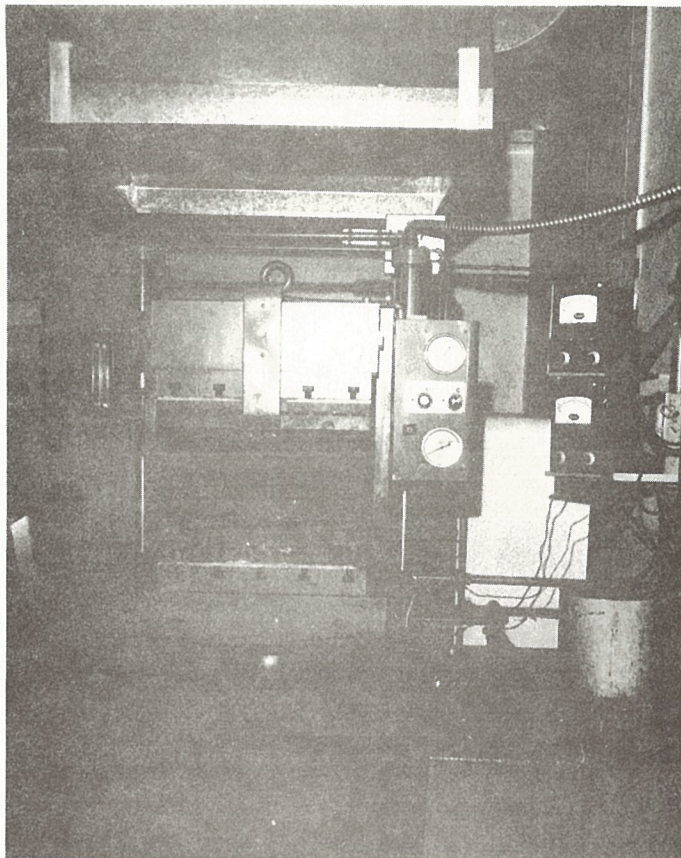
Rubber Moulding Machine. (Neg No EE77 1021)
